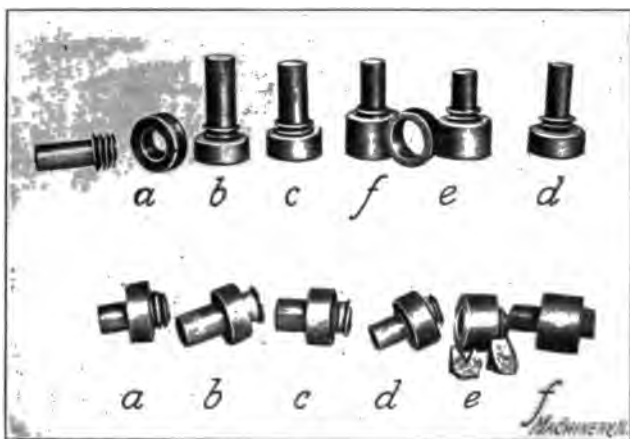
Test Pieces used for Finding the Comparative Strength of Screw Threads
